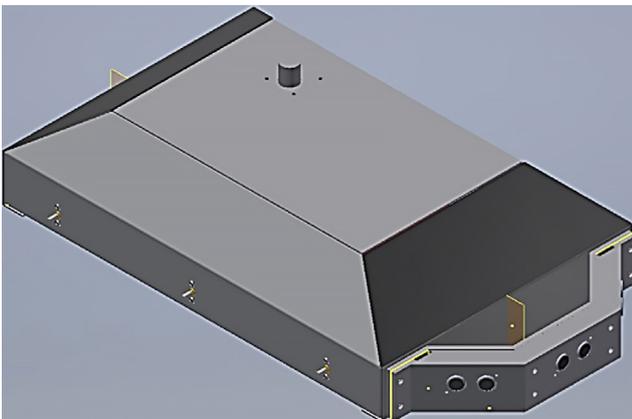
Robot front and rear bumper, for 3-3 ultrasonic range sensors and LEDs - 3D design and printing, PLA material
